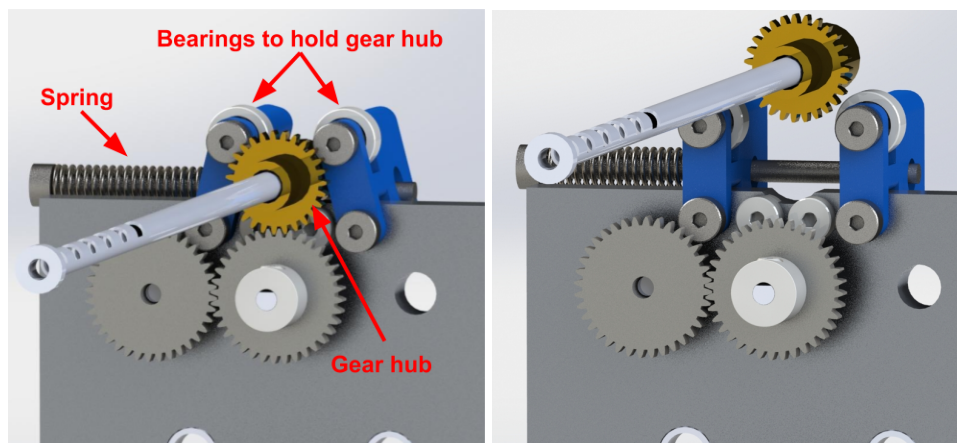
Render of Whisper quick-release with tube in (left) and the tube being taken out (right).
